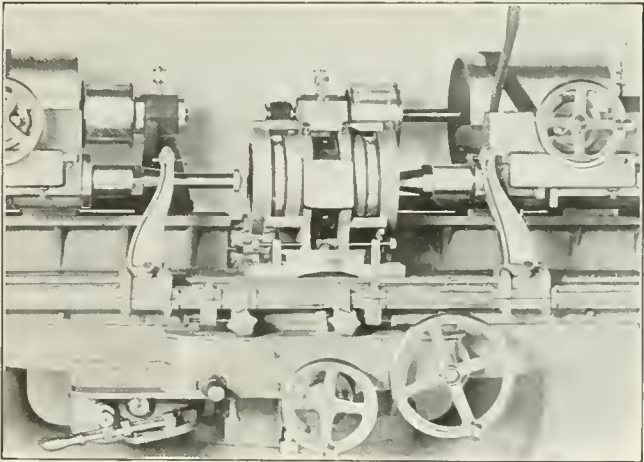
Special Headstock for Holding Pneumatic Hammers, Long Bushings, etc.
